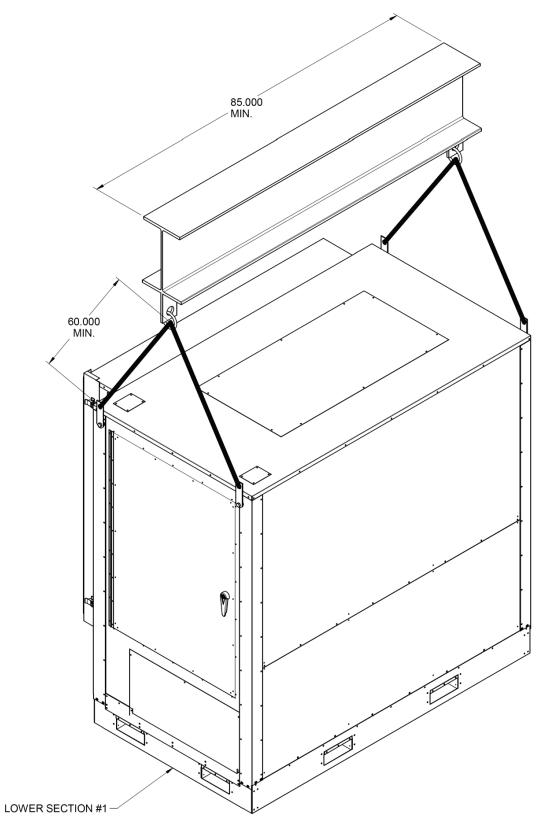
Two Piece Single Unit Coil Section Lifting Details
